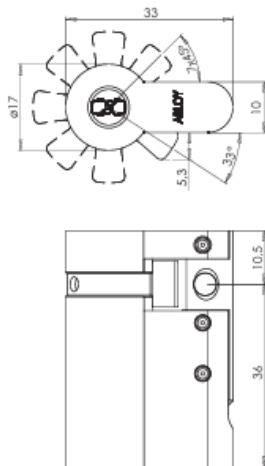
Manufacturer drawing of item 17 Thumb turn 1
